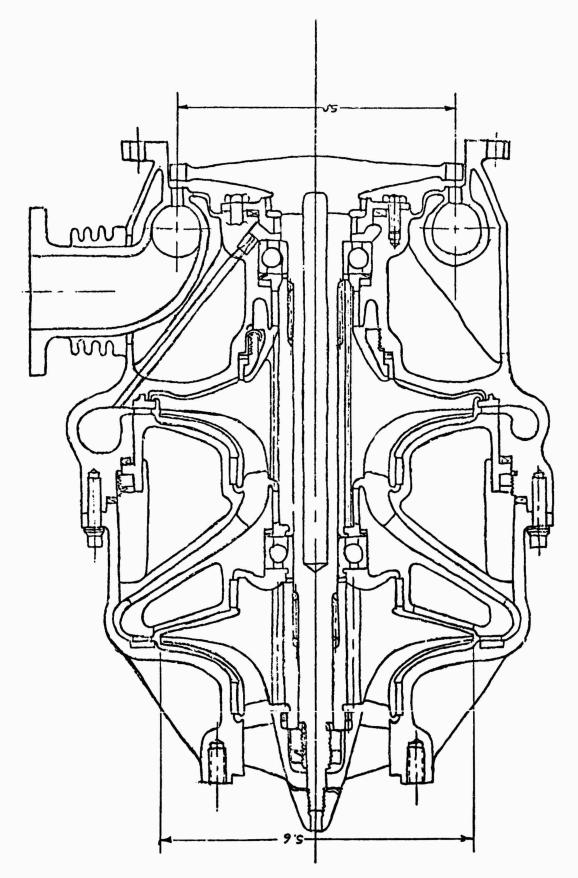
AMPT Fuel Turbopump Two-Stage Pump Preliminary Drawing Used for Configuration Selection
